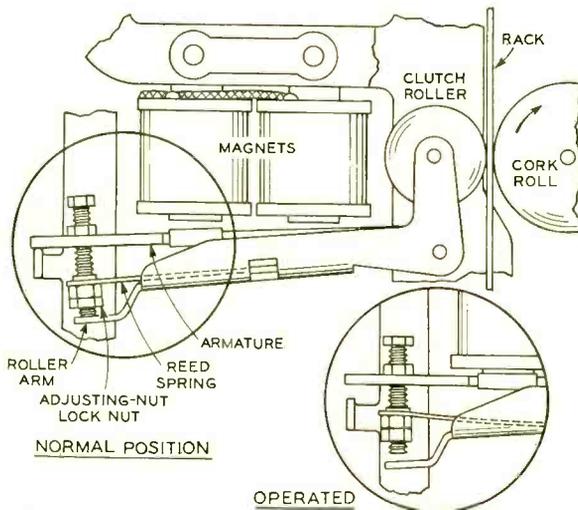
Arrangement of clutch showing reed spring and adjusting screw
